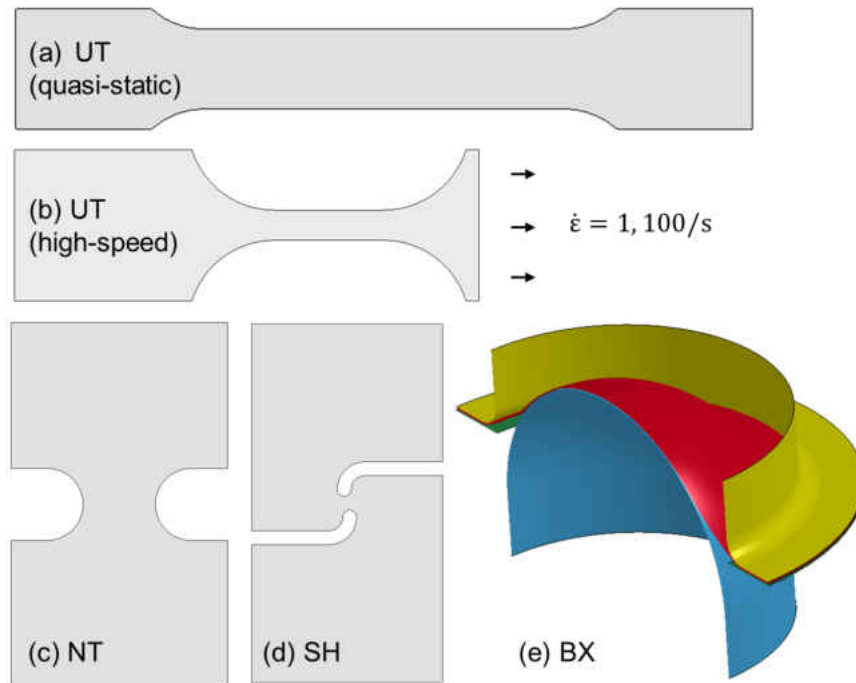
Schematic drawings of specimens tested under quasi-static and high-speed conditions for QP980. (a)(b) UT: uniaxial tension (c) NT: notch tension (d) SH: shear (e) BX: biaxial punch
